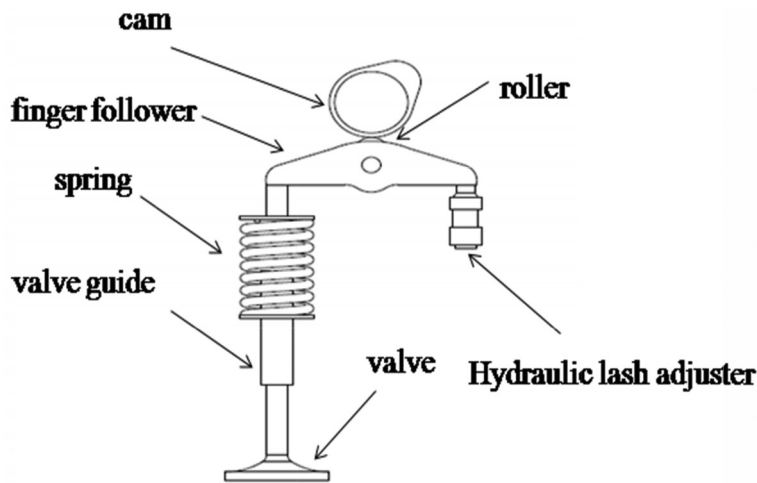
End pivoted roller finger follower valve train with overhead camshaft.
